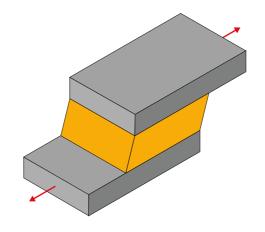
Single lap adhesive joint used in tensile lap-shear test
